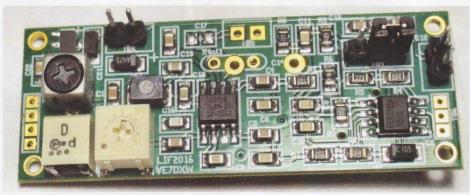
The LIF-2016 SMD PCB. The local oscillator crystal is on the solder side of the board.
